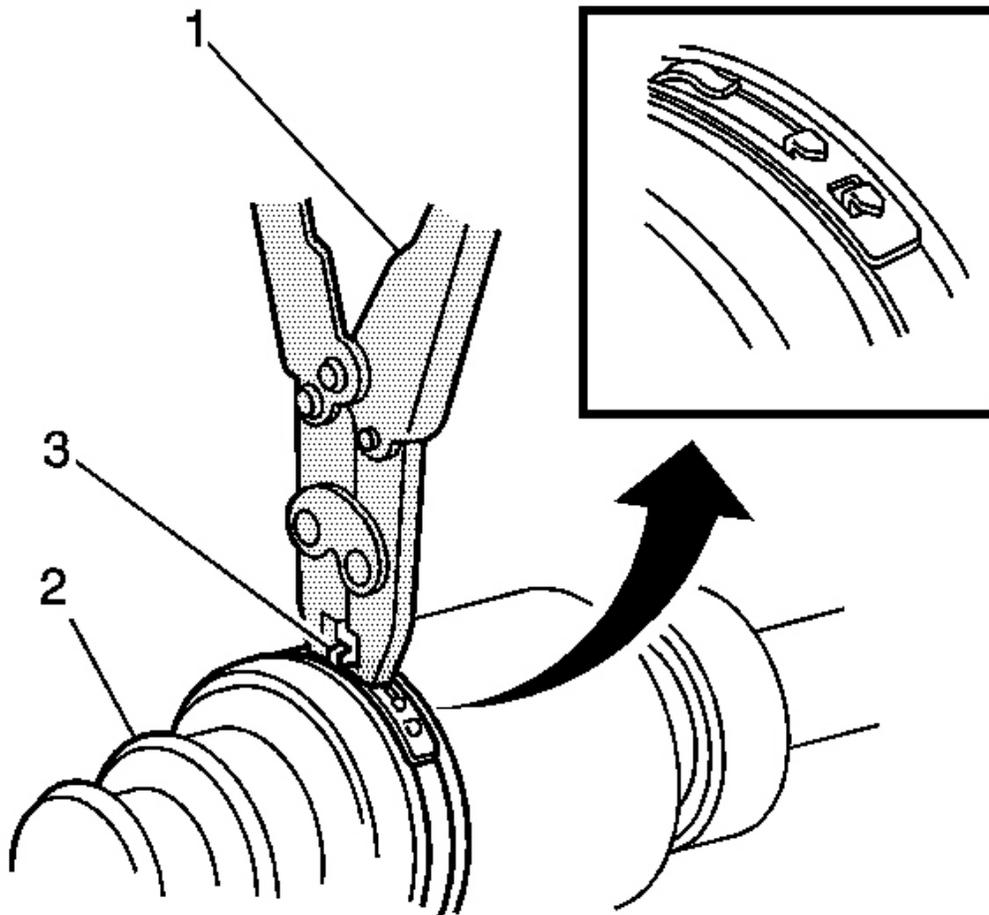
Latching The Large Seal Retaining Clamp Using J 46588
